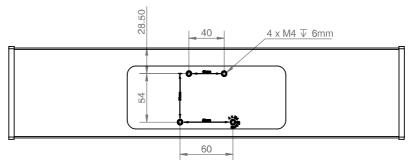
VMD03-1230C \ VMD03-1230 mechanical dimensions (unit: mm)
